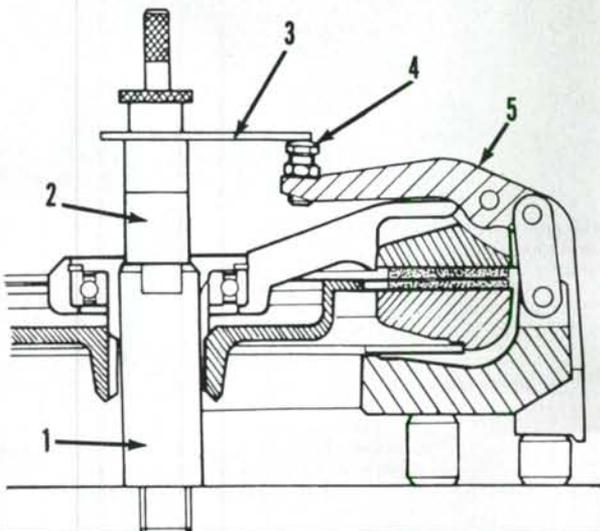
Adjust height of transmission levers using tools shown. Extra spacer DB1248 (5) is used only on 1594 and 1690 models.
